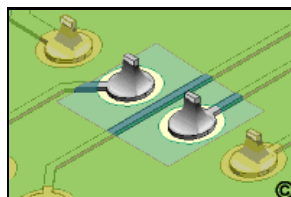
Rubberized abrasives are used to remove thin hard coatings.
